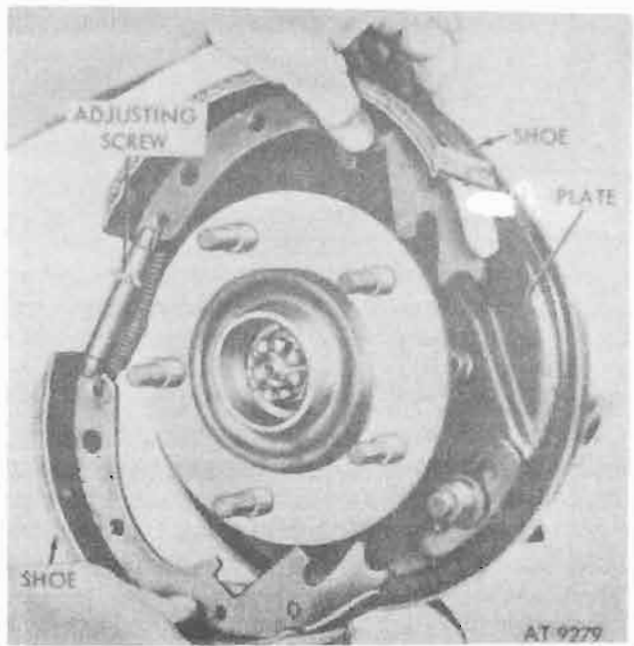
Brakeshoe and adjusting screw and spring assembly.
